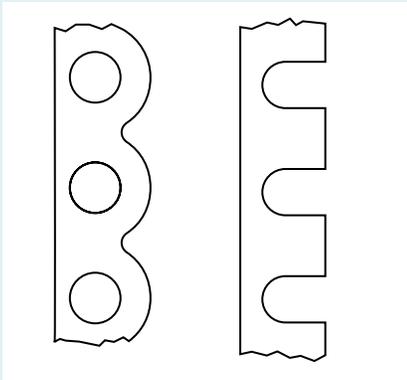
Ears or Slots in Sheet Metal Flanges or Flat Gaskets
